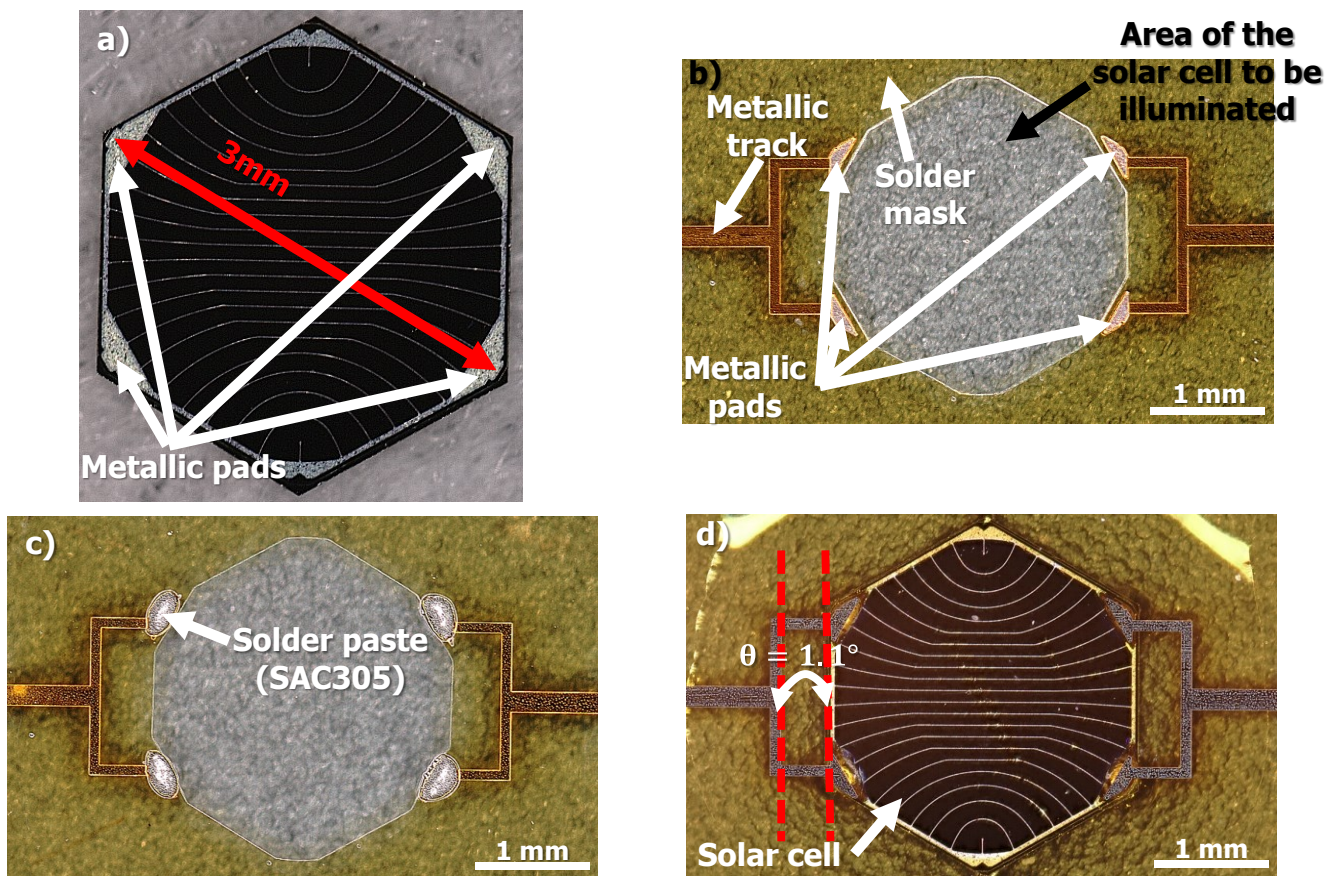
Microscope images of: a) Hexagonal III-V/Ge Solar Cell, b) Example of glass PCB, c) Local deposit of solder paste by stencil printing on glass PCB, d) Microscope image of a solar cell encapsulated on a PCB.
